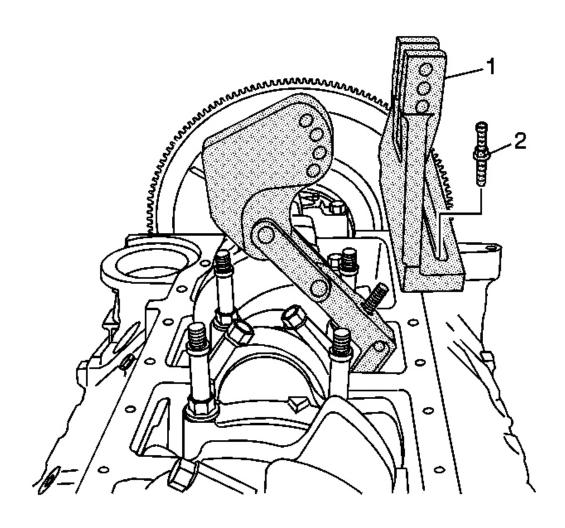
Installing Base & Bolt To Oil Pan Rail Courtesy of GENERAL MOTORS CORP.
